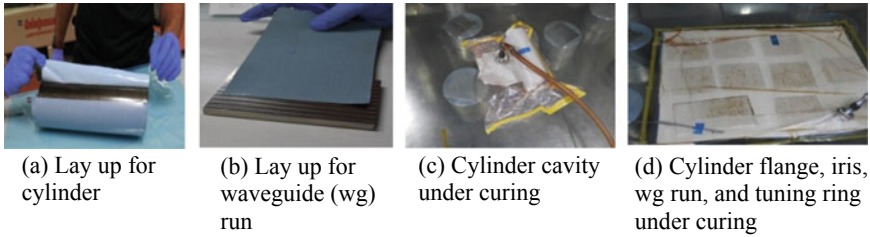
a–d Hand-lay-up and vacuum-bagging and oven curing process for components
